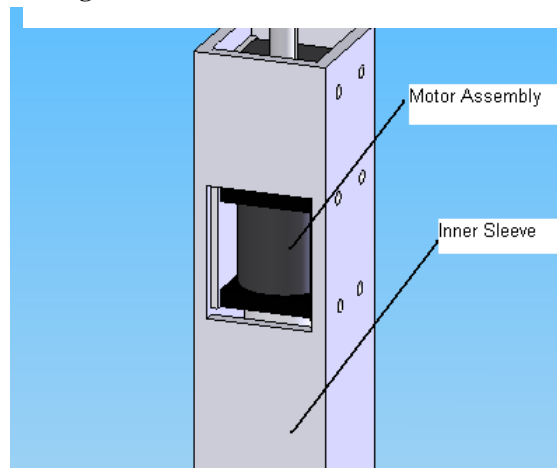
MRS Platform Motor mounted inside upper section of the stand .
